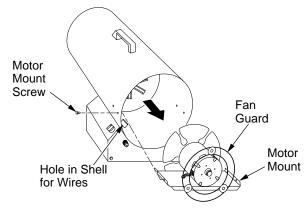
Removing Motor, Motor Mount, and Fan Guard from Heater
